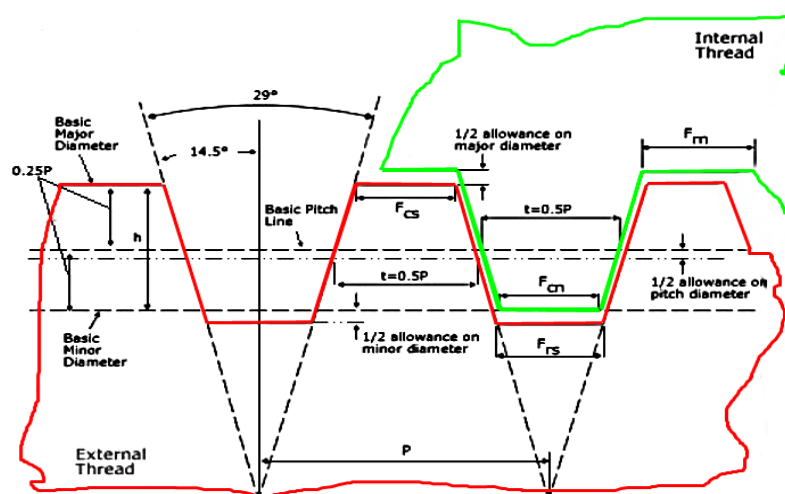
The cutting view of the power screw with the related signs and tooth angle.
